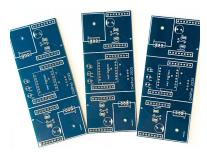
Manufactured PCBs of ChillPod Control circuit
